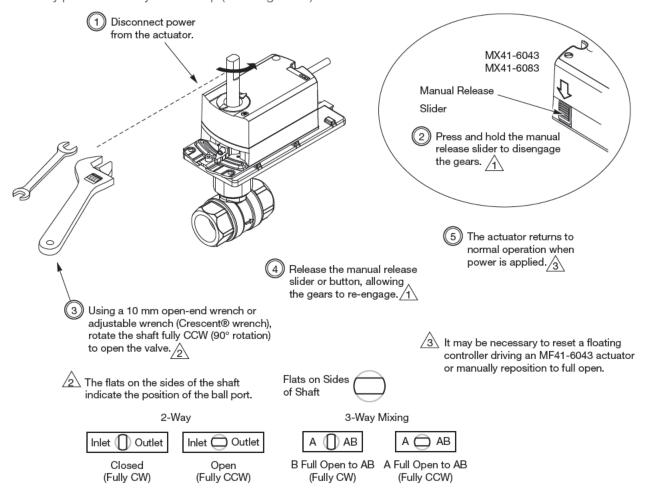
Manually Opening Valve Assemblies Having Mx41-6043 Series Actuators.
